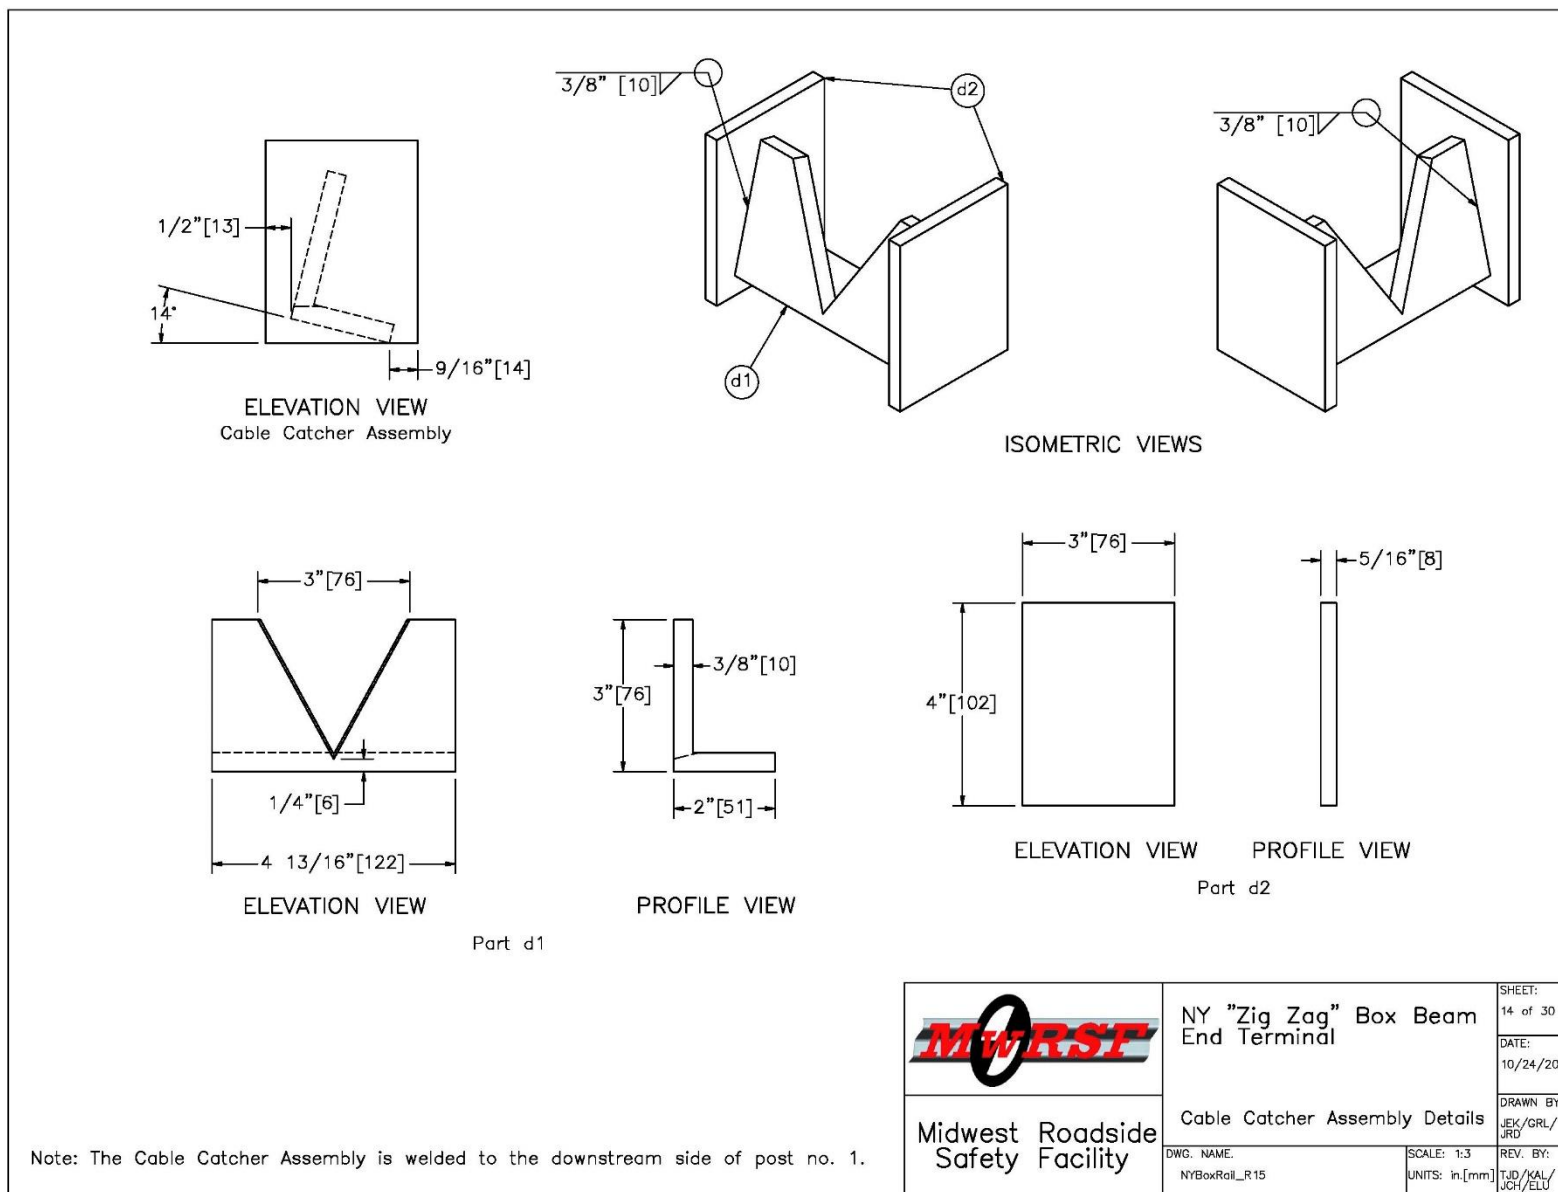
Cable Catcher Assembly Details, Test No. NYT-1
